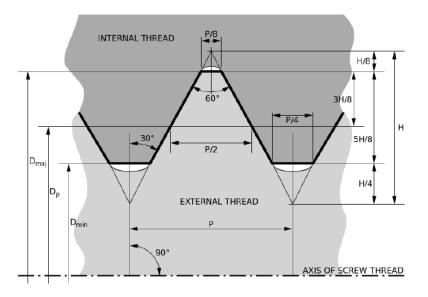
ISO thread dimensioning. Source: Wikipedia (https://en.wikipedia.org/wiki/ISO_metric_screw_thread)
